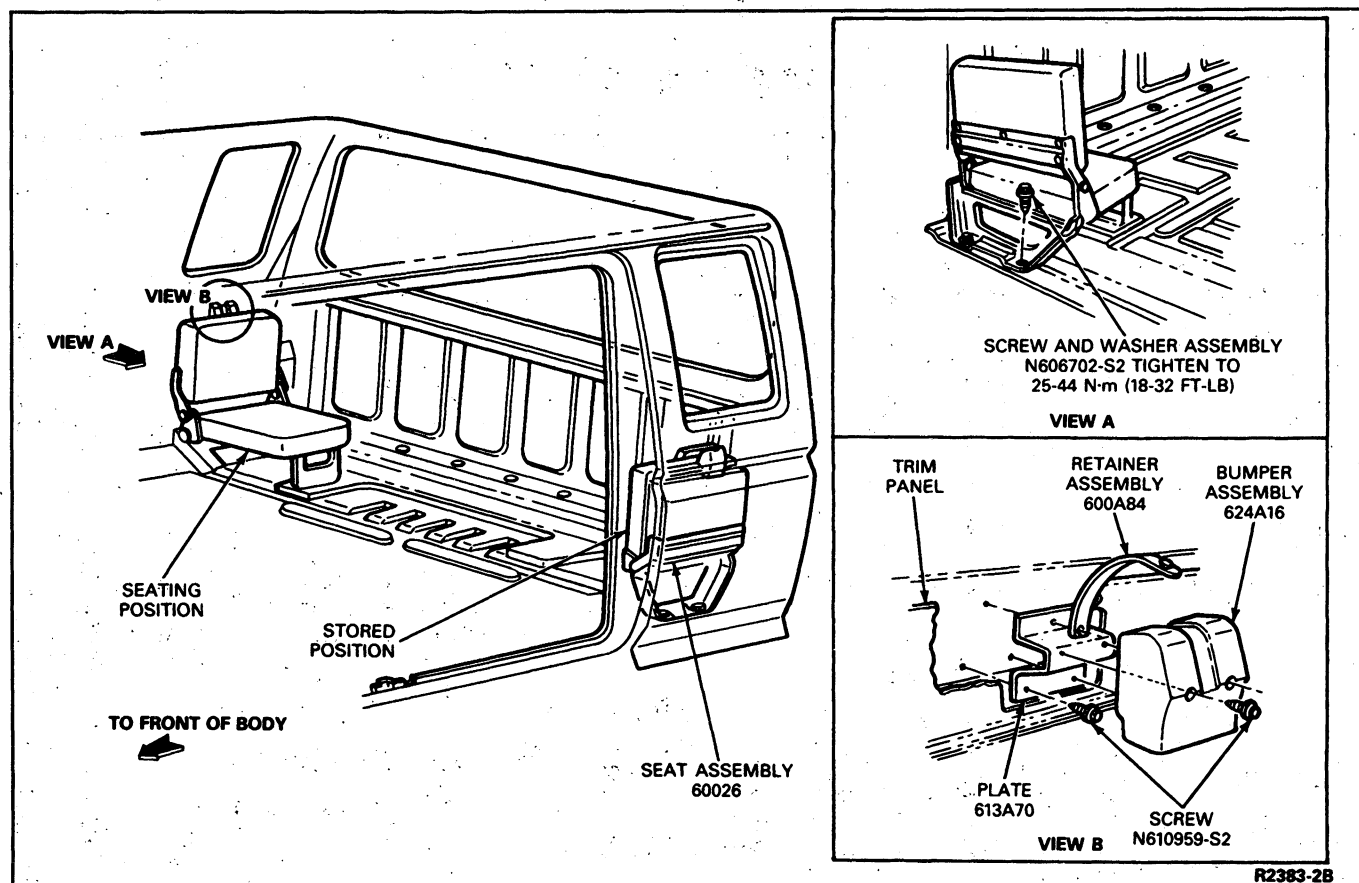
Side-Mounted Folding Rear Seats—F-150—F-350 Super Cab
